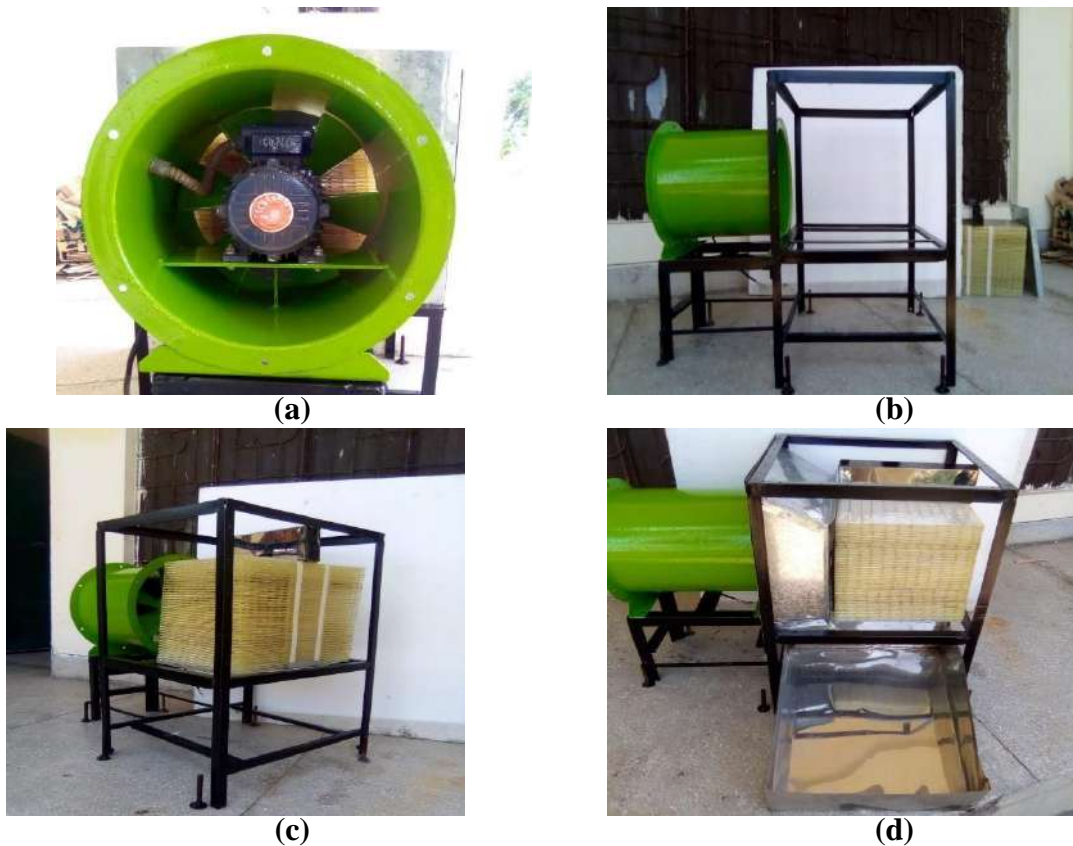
Assembly phases of DVP 04 (a) axial fan, (b) axial fan with external assembly, (c) HMX with external assembly, (d) fixing HMX and water storage sump
